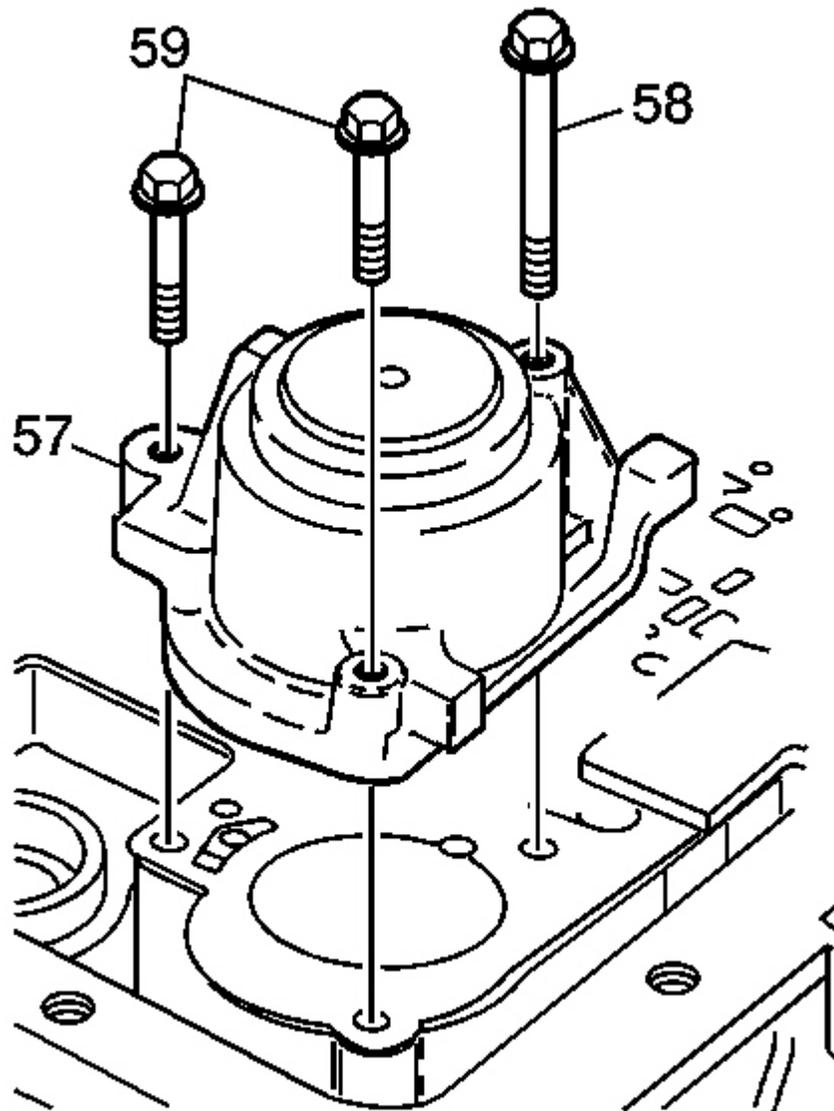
Installing Accumulator Housing Assembly & Bolts
